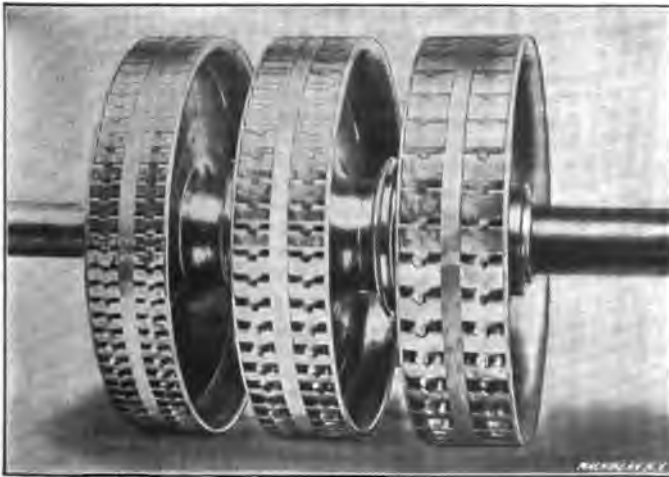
Three-stage Rotor for Sturtevant Steam Turbine
